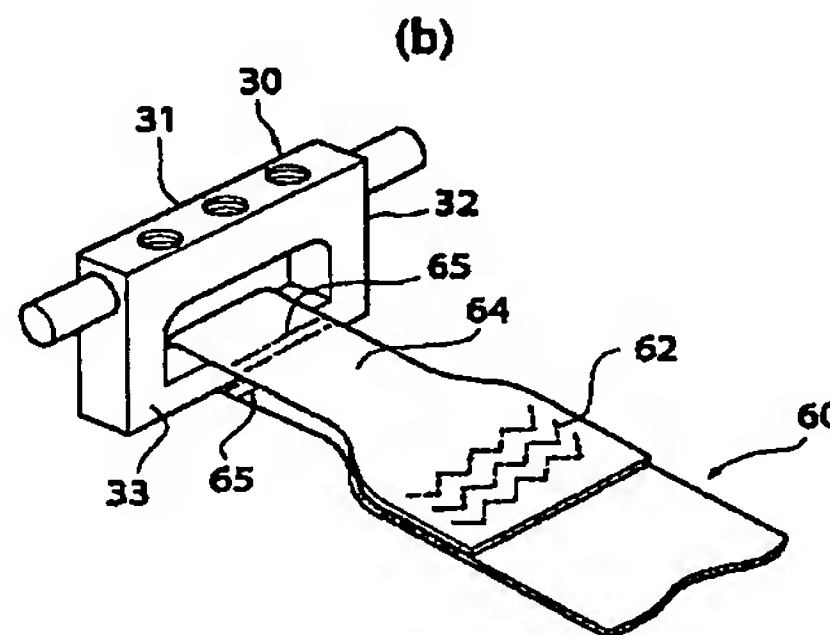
Fig. 2 is an exploded perspective view of the seat belt tension sensor.
